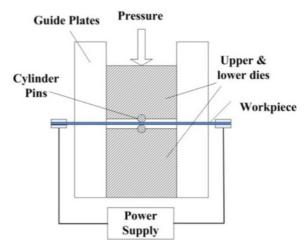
A schematic of the EA pressure welding process (modified and redrawn from Ref. 92)
